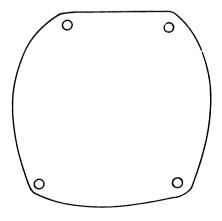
THE SOLE OR COVER PLATE IS SHAPED TO FIT THE SHOE
